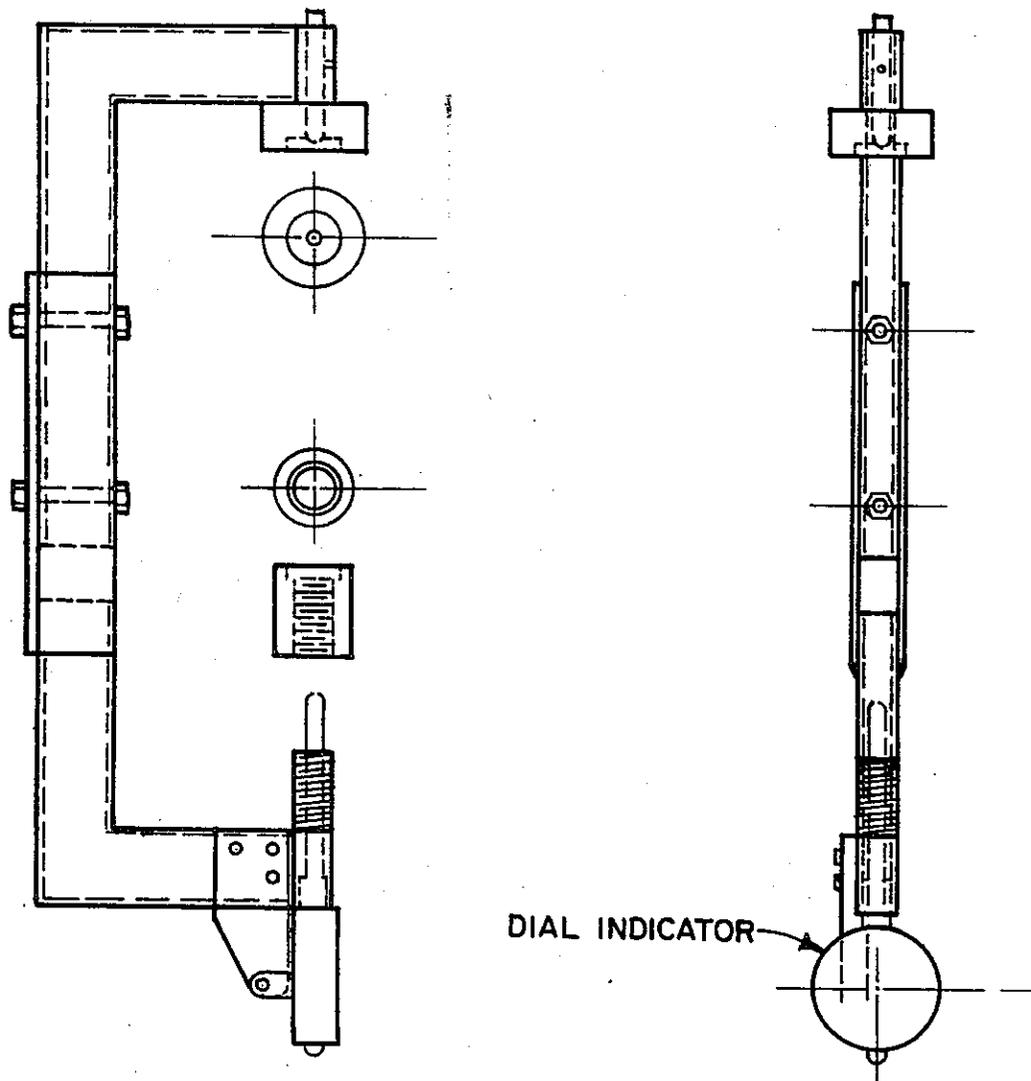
Tubular steel "C" frame used to measure elongation of anchor bars.
